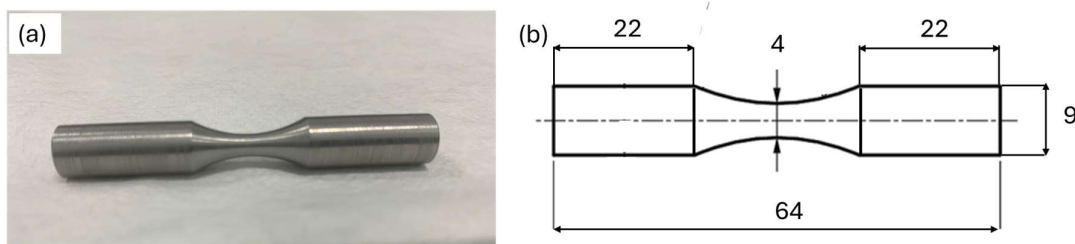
(a) Definite image of test specimen. (b) Illustrative diagram of specimen's dimensions (mm).
